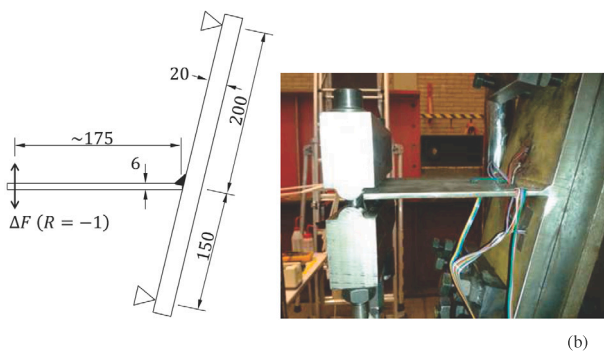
Specimens of current study for Detail C2a and C2b, steel grade S355: (a) Dimensions (in mm); width = 200 mm; (b) Mounted in set-up.
